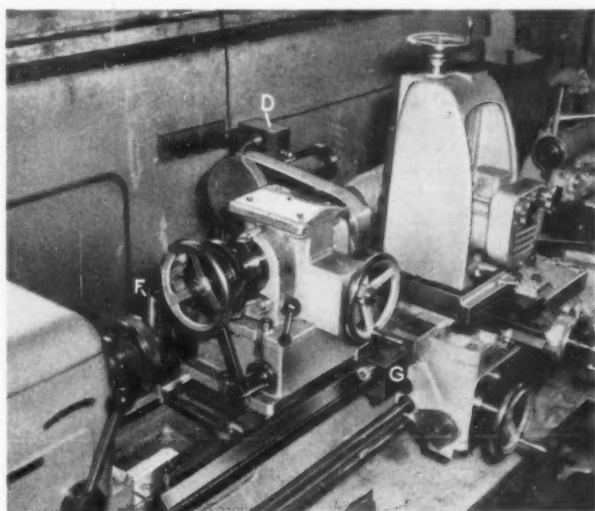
A View, from the Headstock End, of the Lathe which has been Specially Equipped for Milling the Cam Tracks on Selector Plates
